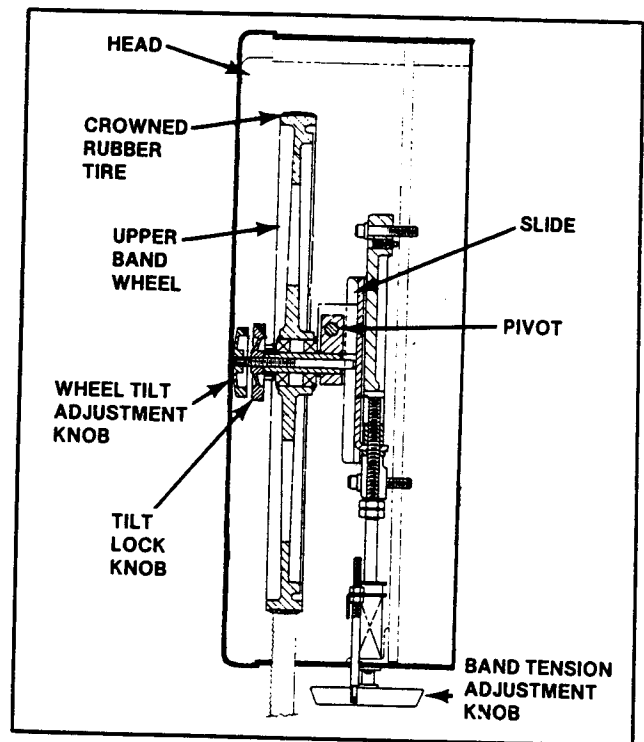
WHEEL TILT ADJUSTMENT - HEAD SIDE VIEW.
